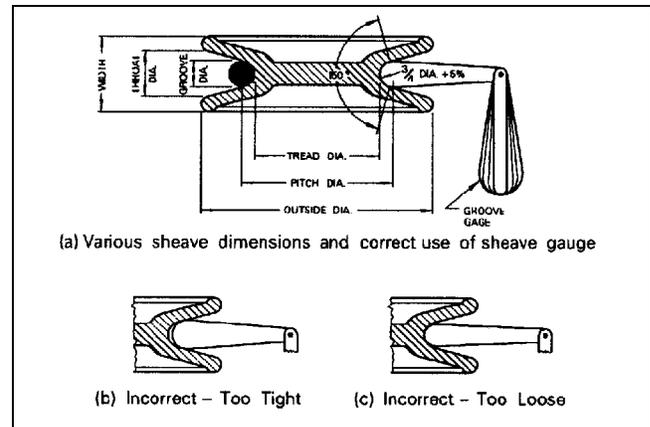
Measuring groove diameter with a Go/No-Go gauge
